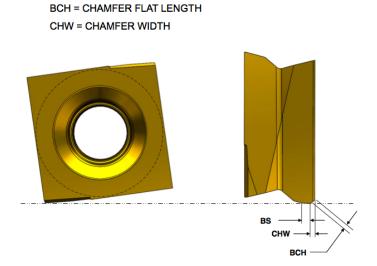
Cutting Tool Measurement Diagram 3 (Cutting Item – ISO 13399)
